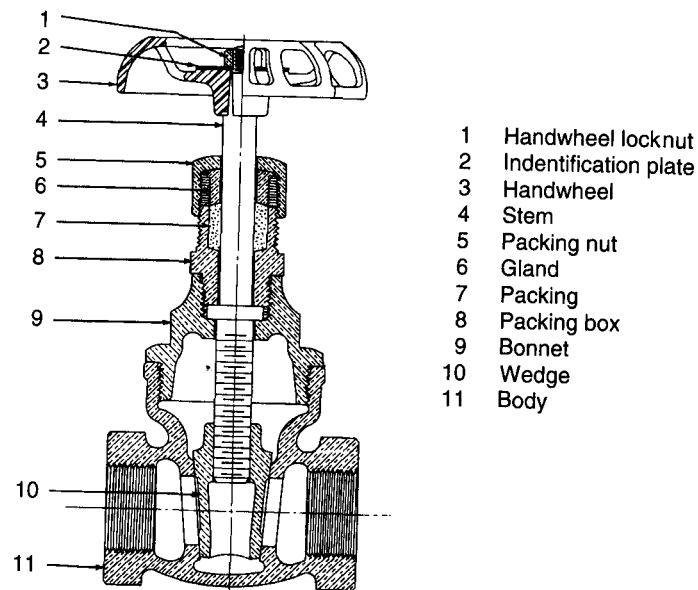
Nonrising-stem, screw-in bonnet, one-piece (hollow) wedge disk, inside screw gate valve. Courtesy Crane Company.
